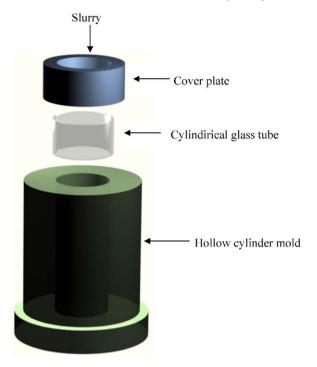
The casting unit for the multilayer compaction of membrane filters.
